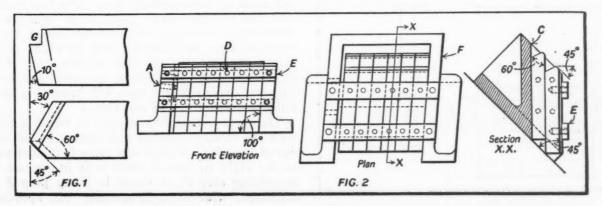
High-carbon Steel Tool Shank with the End Machined to Take a Carbide Tip Fig. 2. Fixture for Milling the 45-degree Angle with 10-degree Rake on Tool Shank
